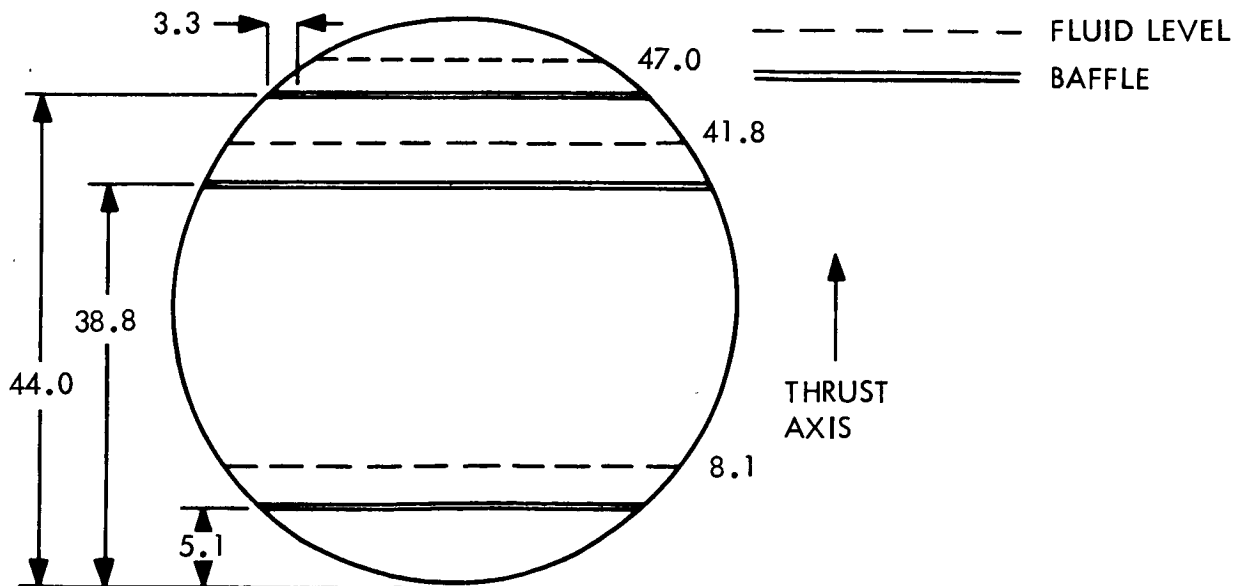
Ring Baffle Dimensions for Optimum Damping
